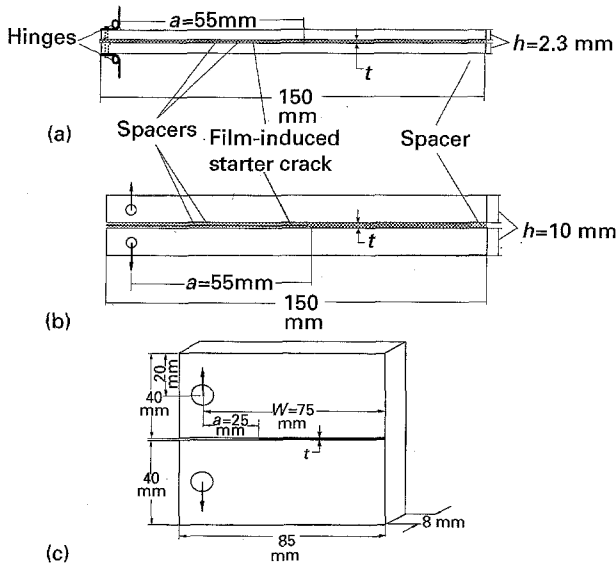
Schematic drawings of CT and DCB adhesive joints: (a) CF/epoxy, (b, c) aluminium specimens, t is the bond thickness.
